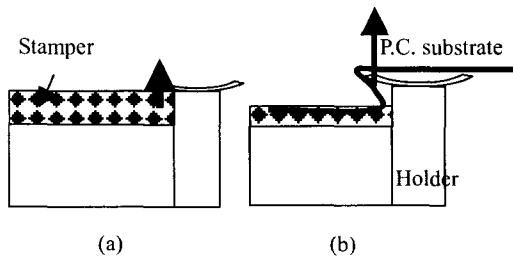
(a) Holder is broken by stamper because thickness is too thick
